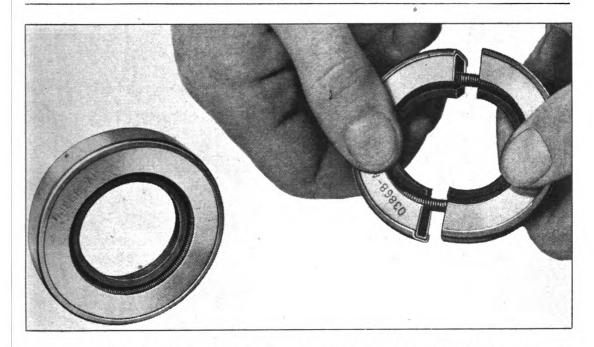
Detail of Oil Seal. At Left Complete Seal Ready for Installation with face Toward the Oil Pressure. Seal at Right Cut Open to Show Arrangement of Leather and Coiled Spring in Seal
